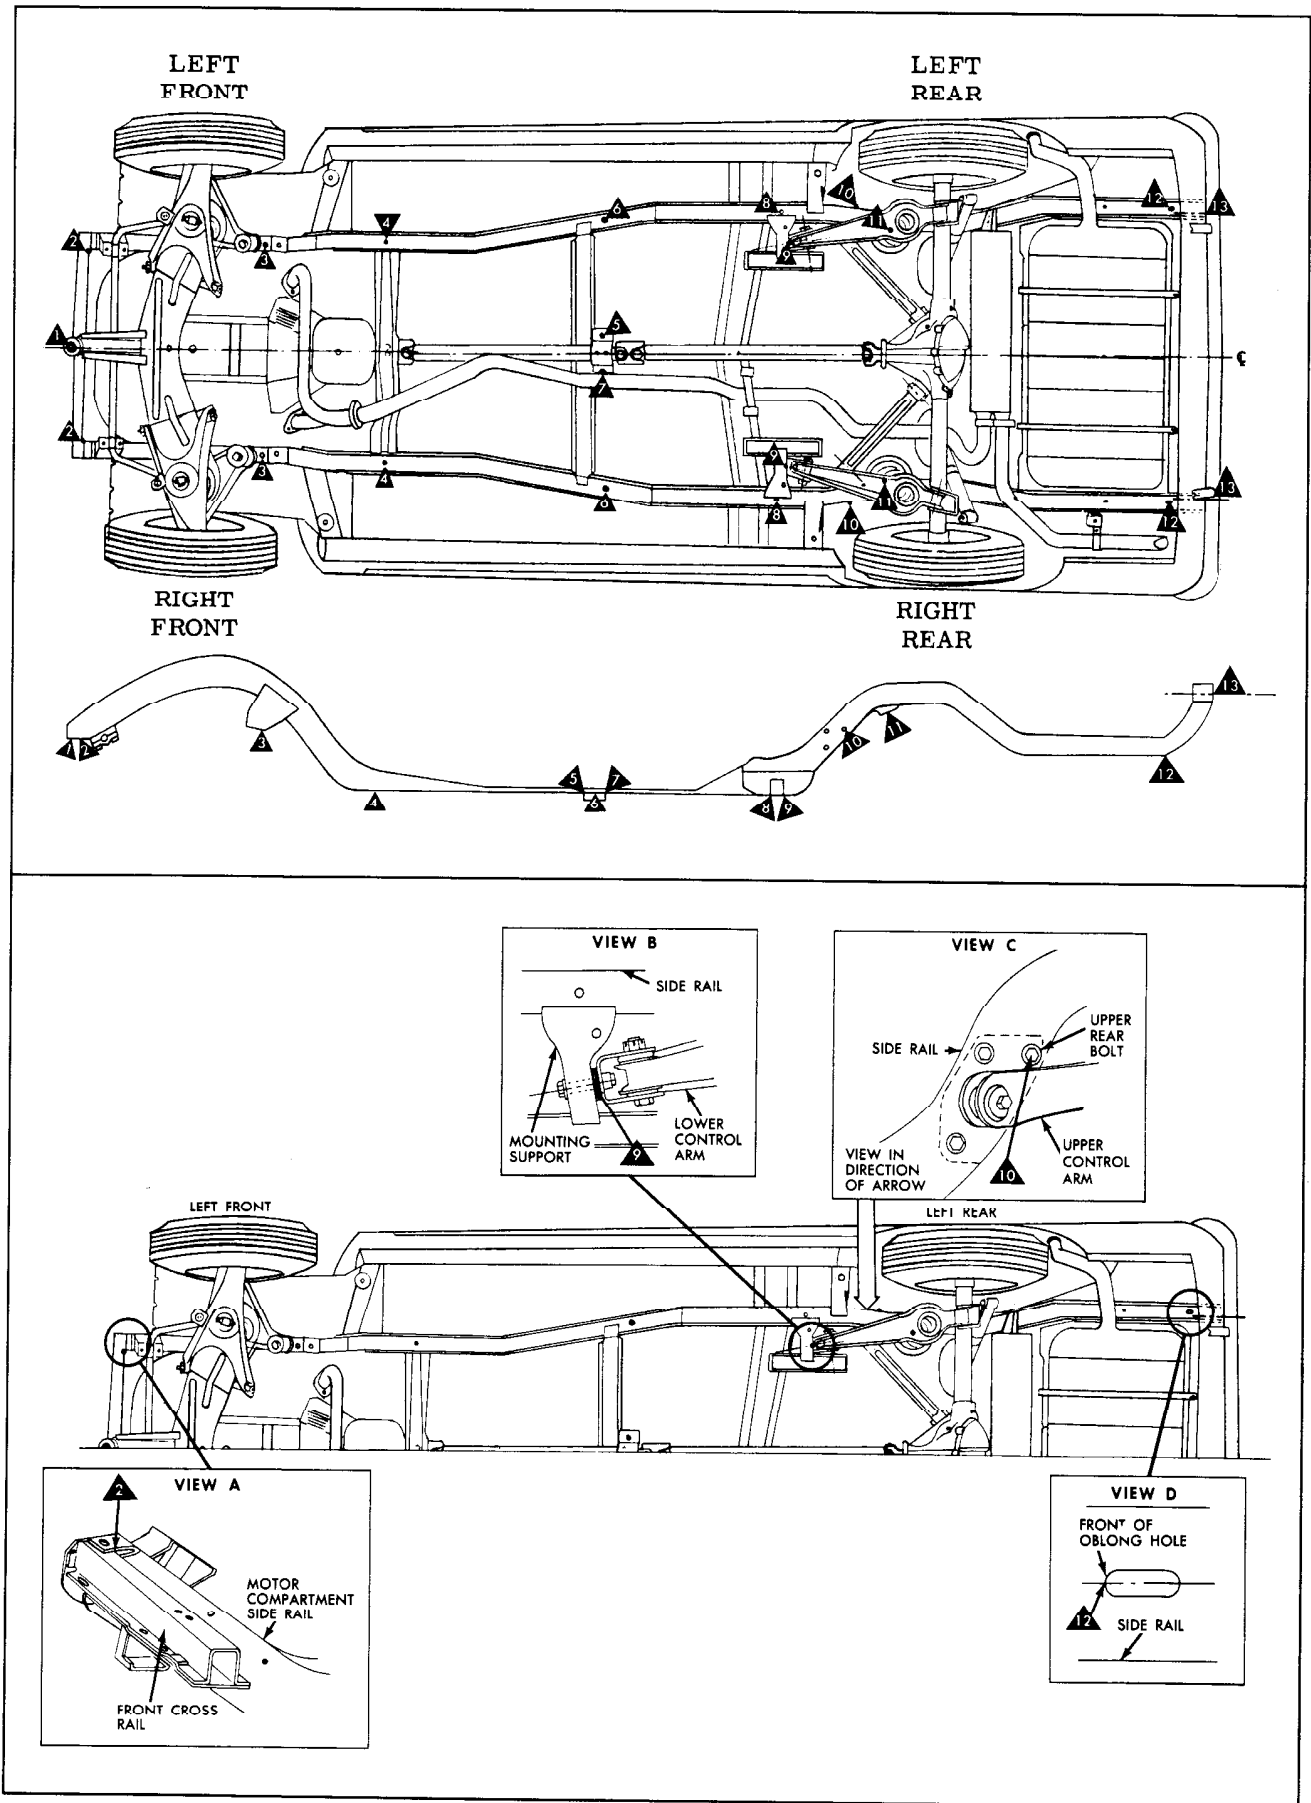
Location of Underbody Alignment Reference Points (Consists of 15-1-A & 15-1-8)
